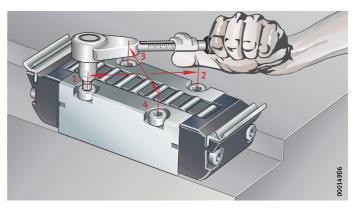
Tightening of linear roller bearings to the tightening torque MA
